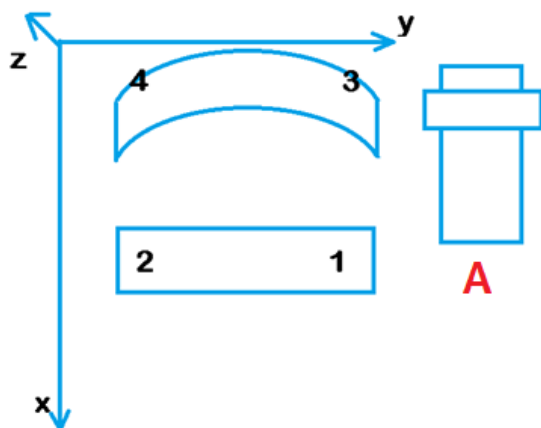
Thermometers displacement (1,2,3 and 4); A: sketch of CMM (machine axes: blue);
